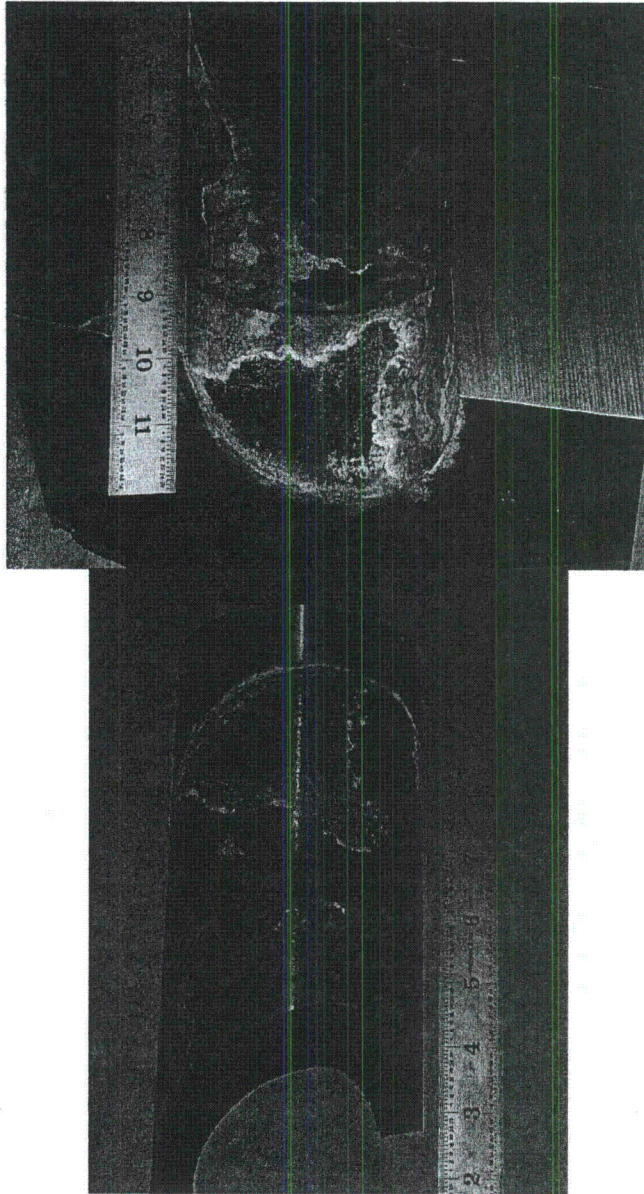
Exposed RPV Head and Nozzle from High Side Section
